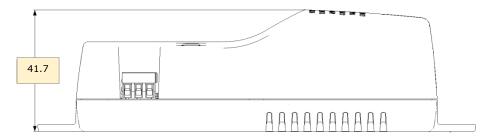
LDSBus Trailing Edge Light Dimmer Dimension - Side View
